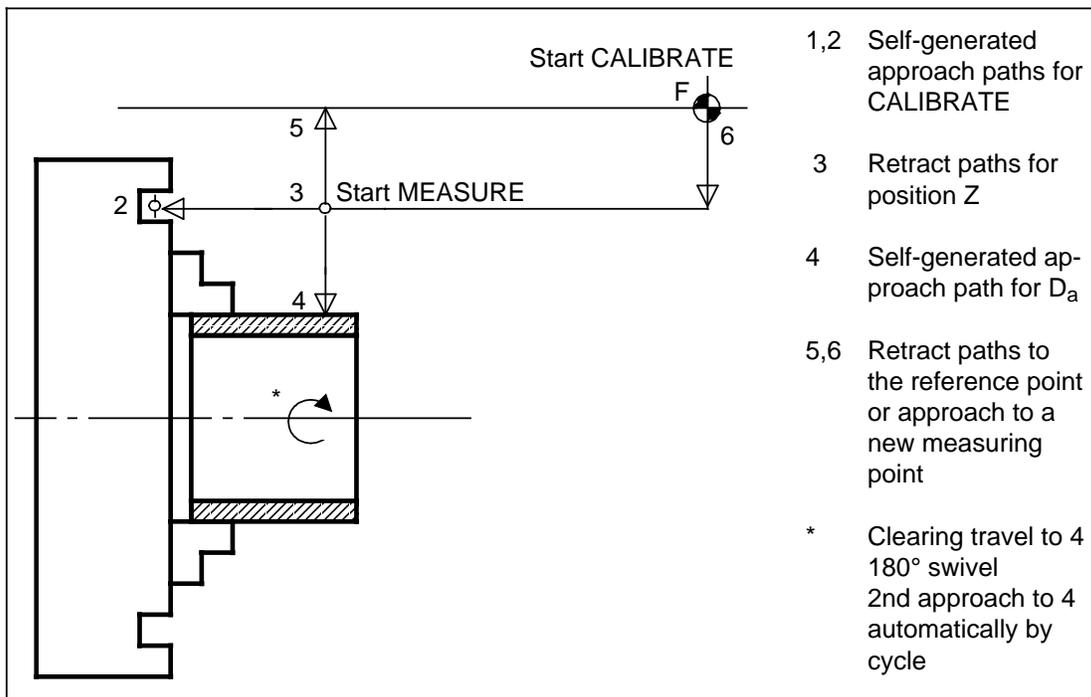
1-point measurement with reversal on outside diameter with CALIBRATE
